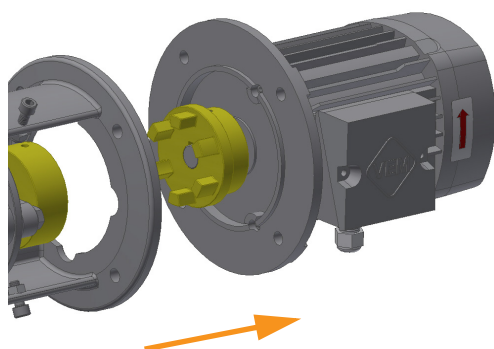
Bearing housing (drive side): Pulling off motor from bearing housing
